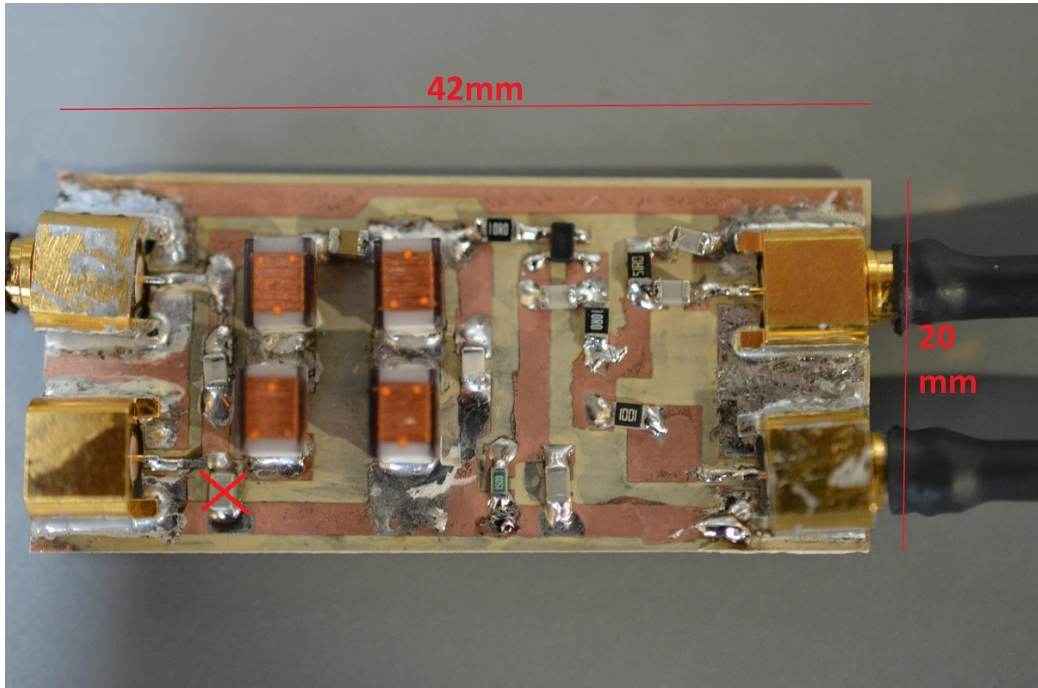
Picture of the home made PCB containing the double tank amplifier circuit. This is the PCB that is implemented in our STM setup. The crossed out capacitor is a component we took out in our final design and which is also not shown on the circuit drawings.
